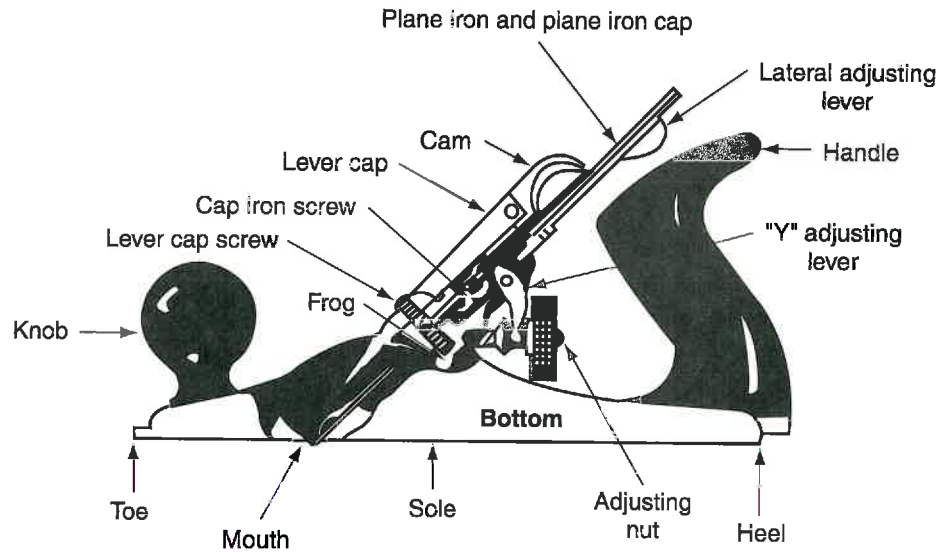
Knowing the parts of the plane helps you adjust and use the tool. (Stanley Tools)
